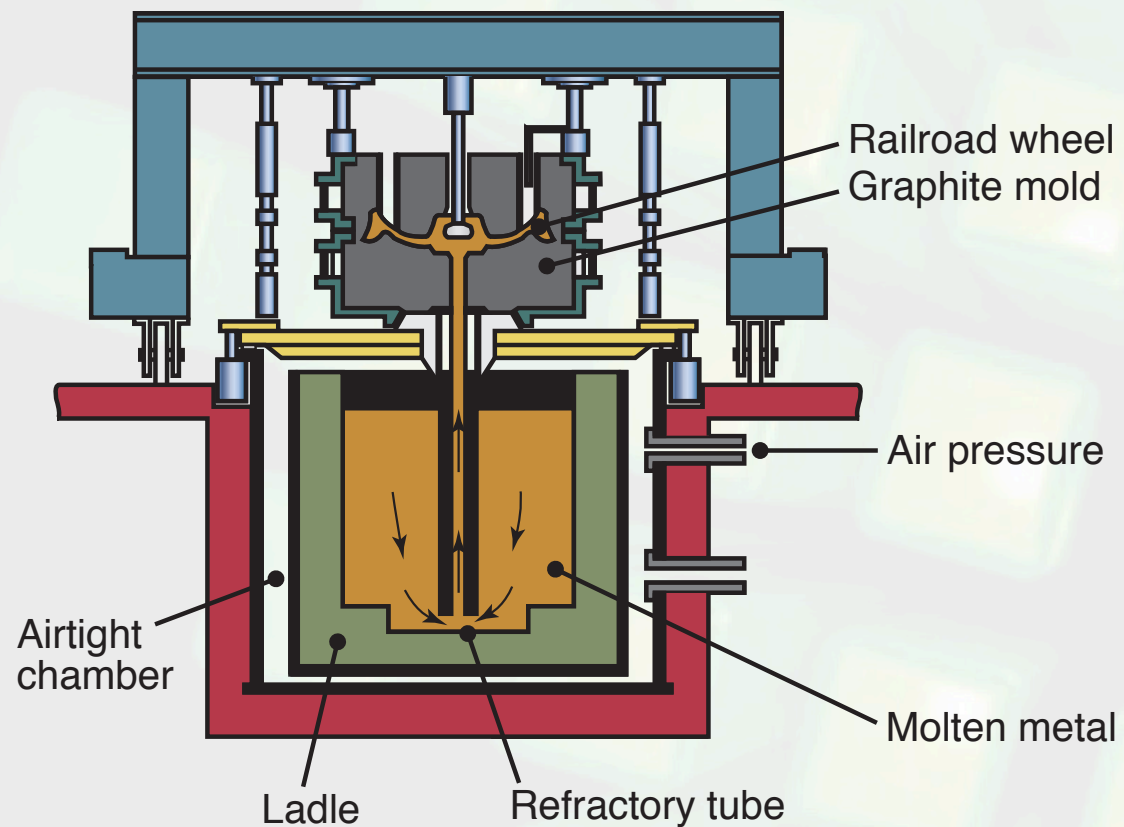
The pressure casting process, utilizing graphite molds for the production of steel railroad wheels. *Source:* Griffin Wheel Division of Amsted Industries Incorporated.
